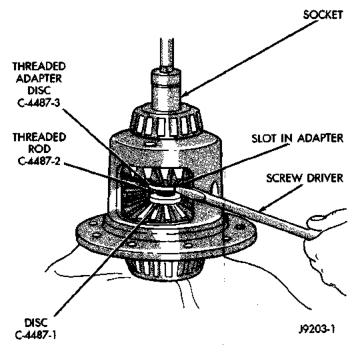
Threaded Adapter Installation—Shown With 6963-A Holder
